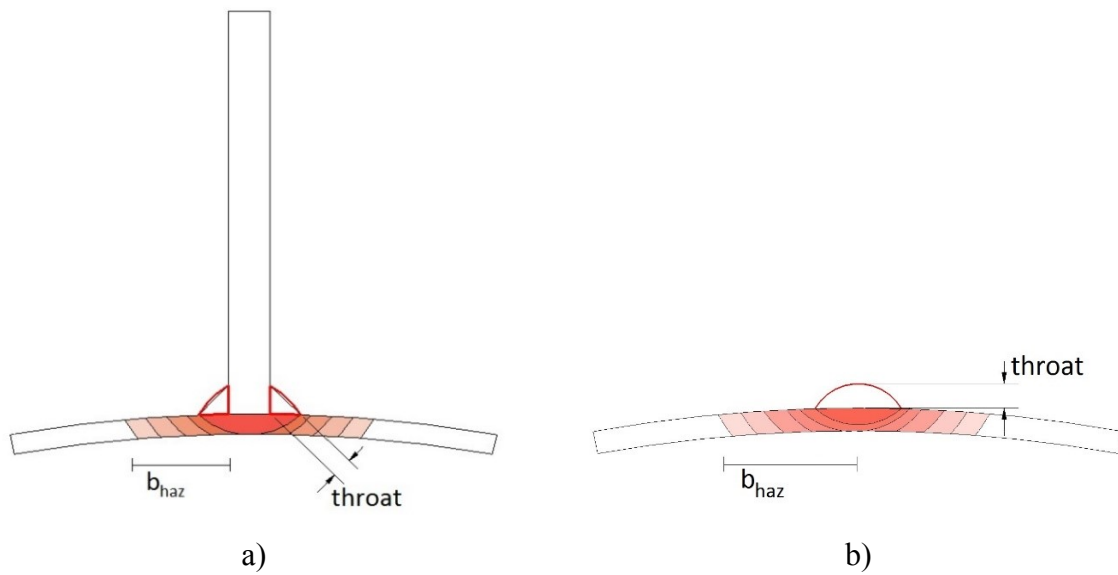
HAZ for a) associated component welded on a cylinder wall and b) fillet weld laid onto a cylinder wall.
